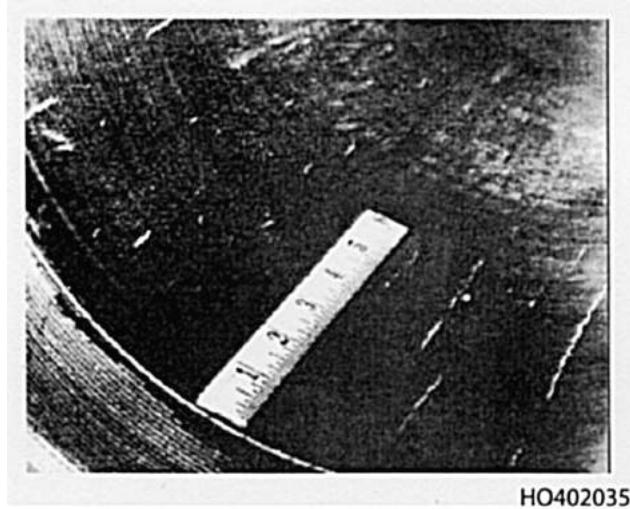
Magnetic Particle Indications of Flakes in a Bore of a Large Hollow Shaft
